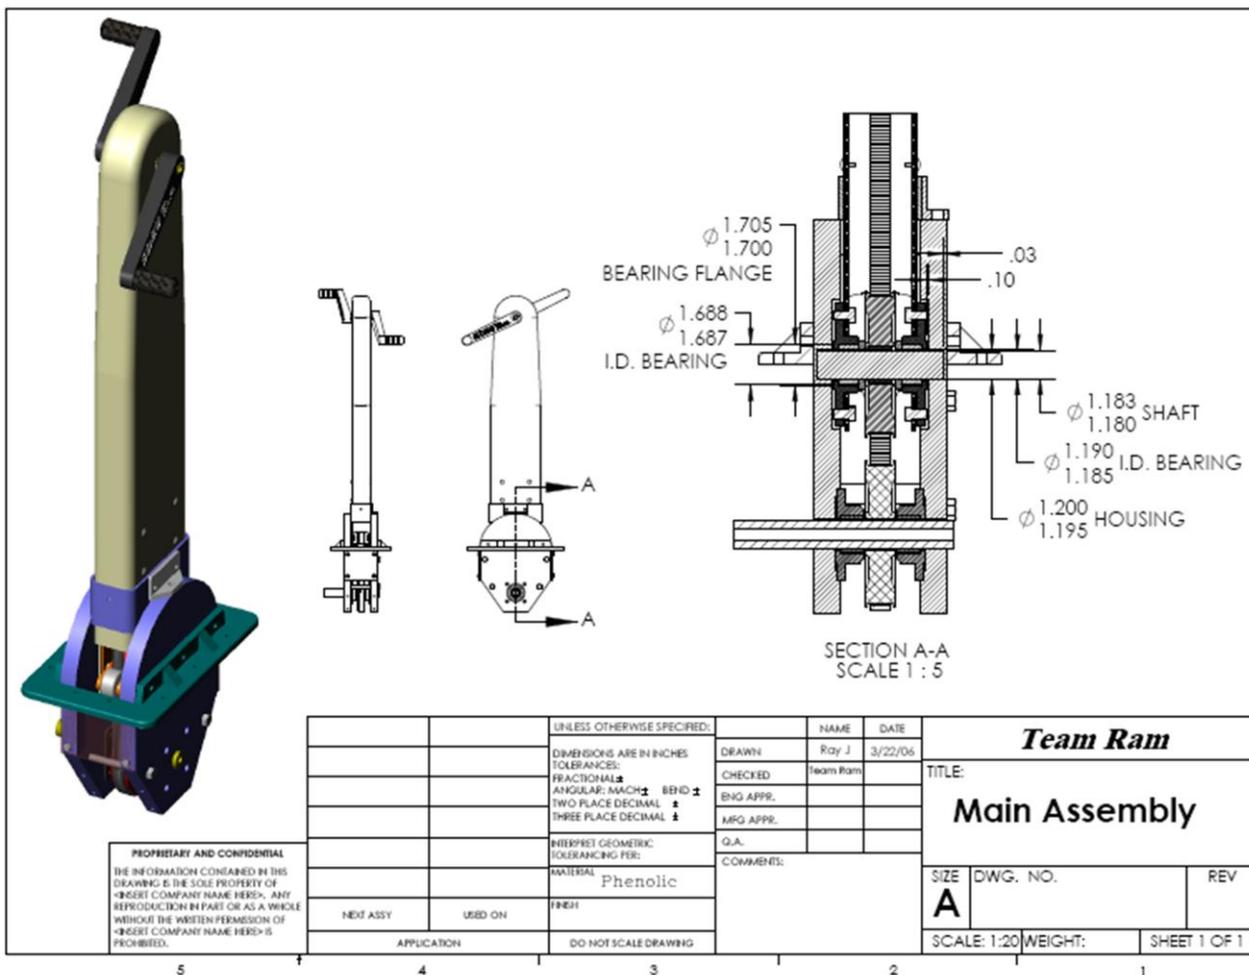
CAD Model and Assembly Drawing of Pedestal Winch Grinder.
